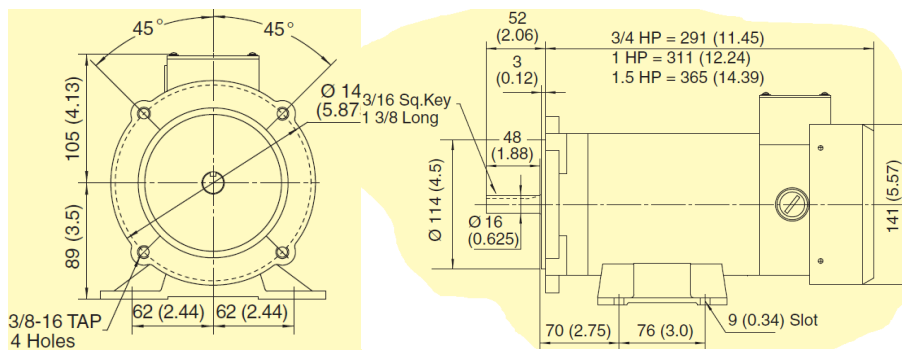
Standard Dimension of NEMA 56C DC Motor
